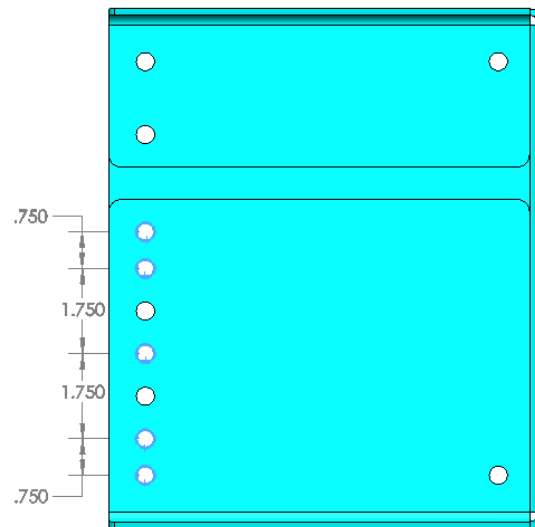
CLOSE-UP OF BRACKET 3, SHOWING ITS HOLE PLACEMENT.
